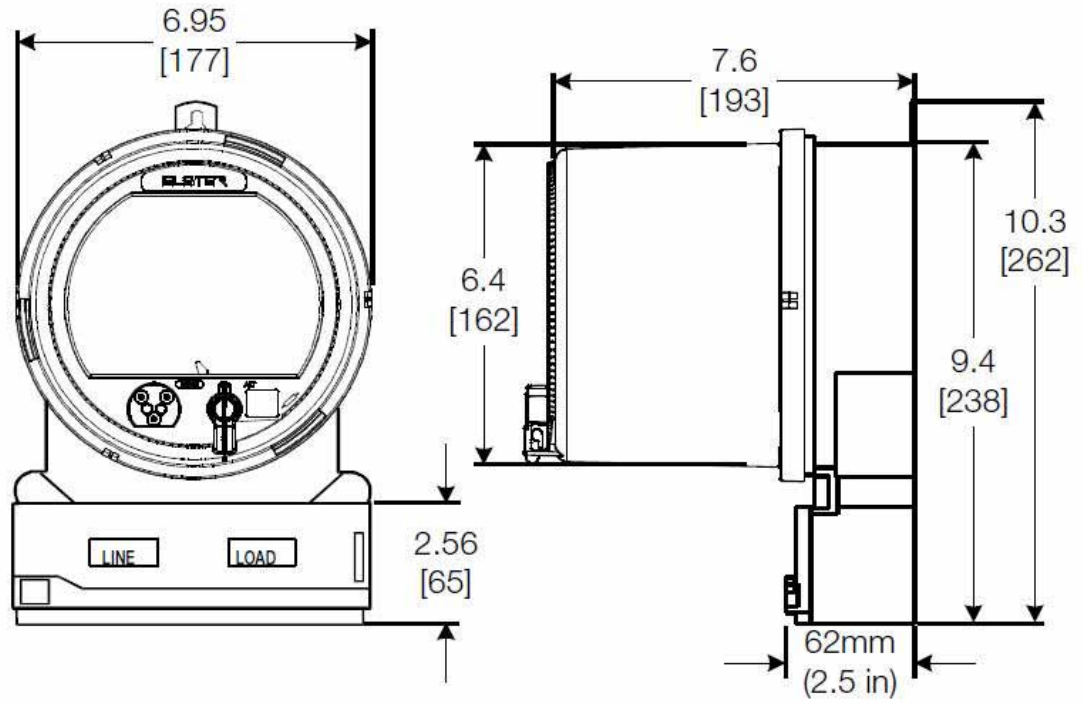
2. A-base Meter Type and Dimensions in Inches (millimeters) - Front and Side View
